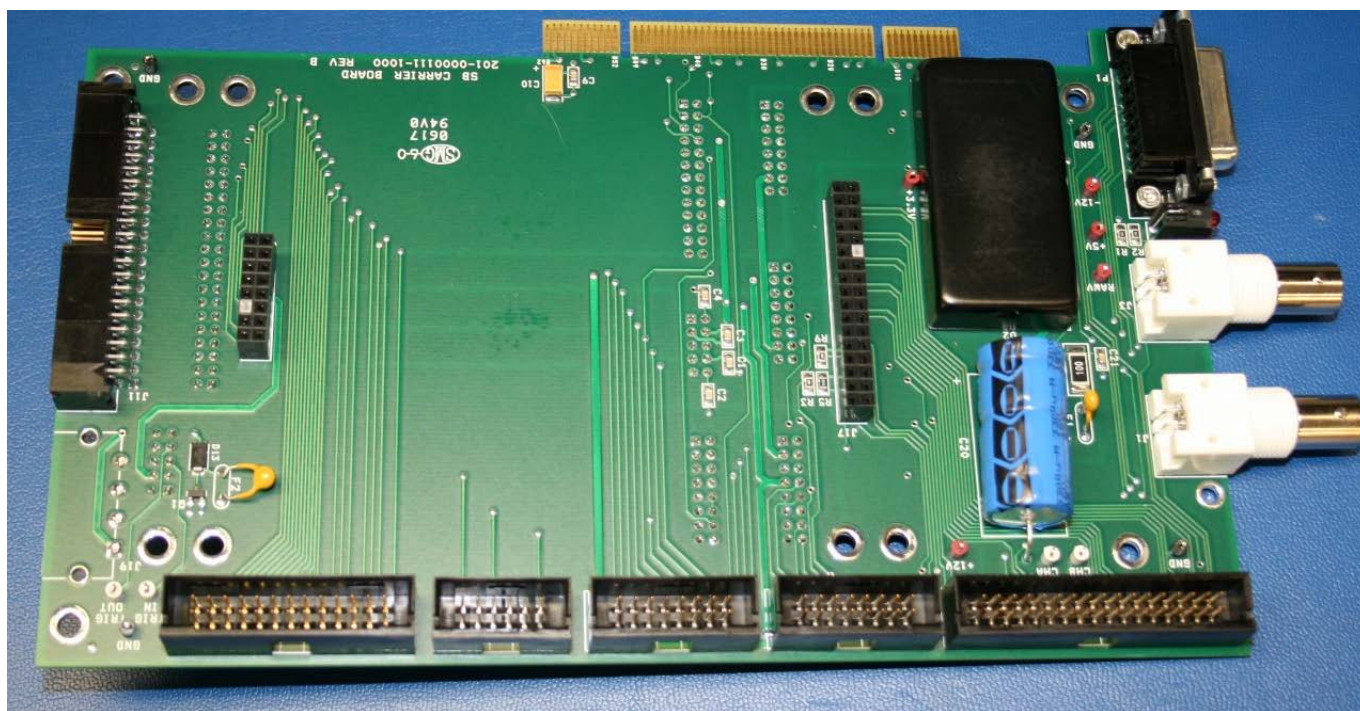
Tiger Board Set: Carrier (Front view) – 0006013
